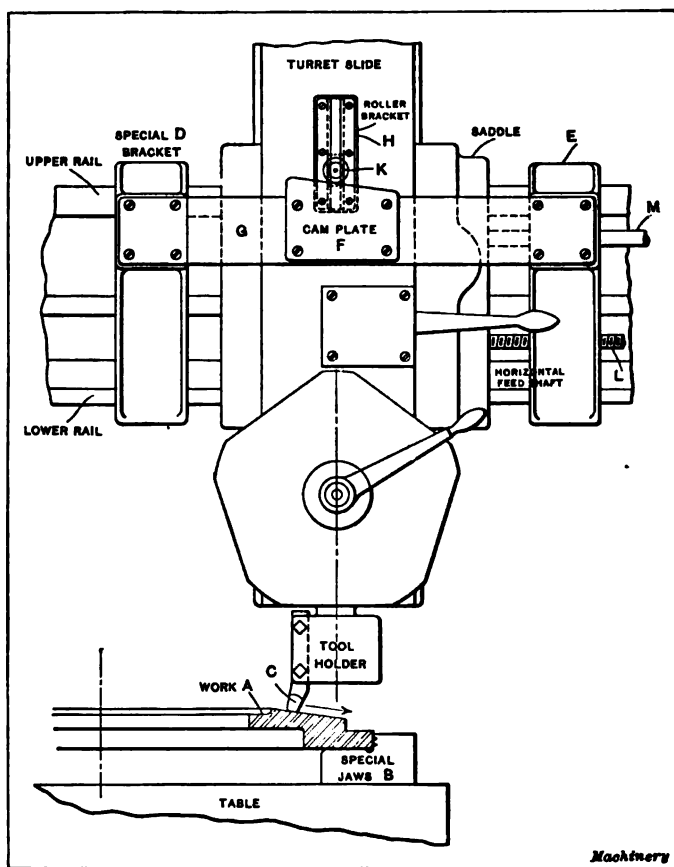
Angular Forming Attachment for a Vertical Boring Mill
